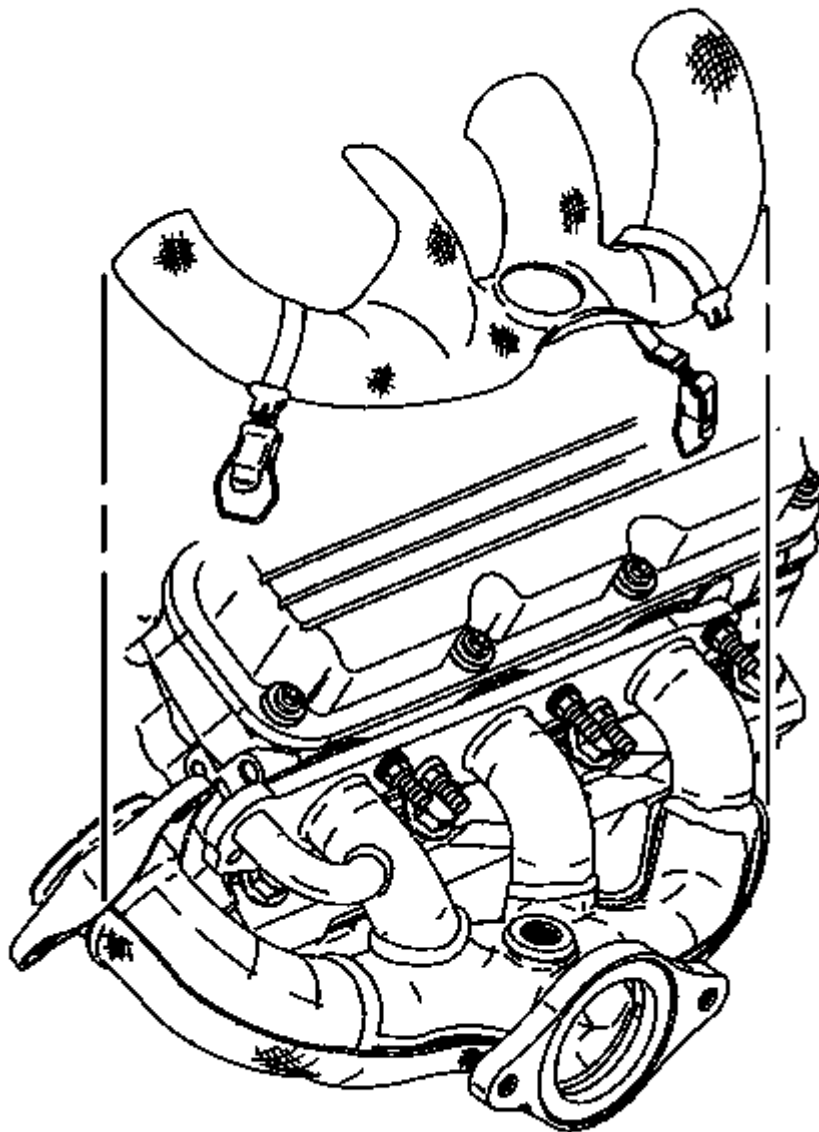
Installing Upper Right Exhaust Manifold Heat Shield
